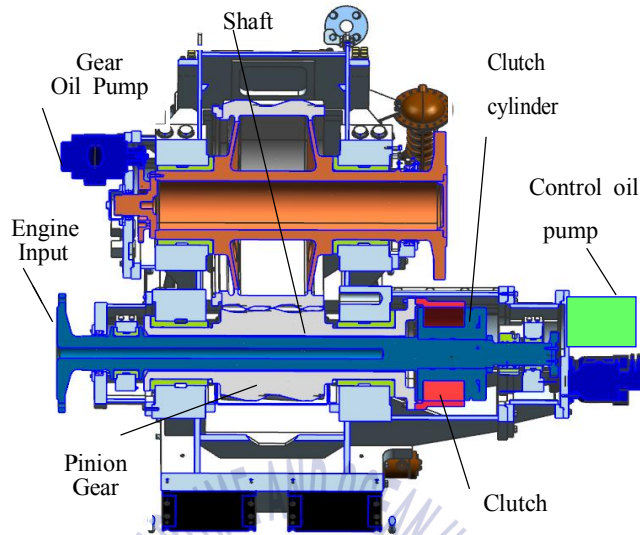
Section of diesel engine reduction gear¹⁾
